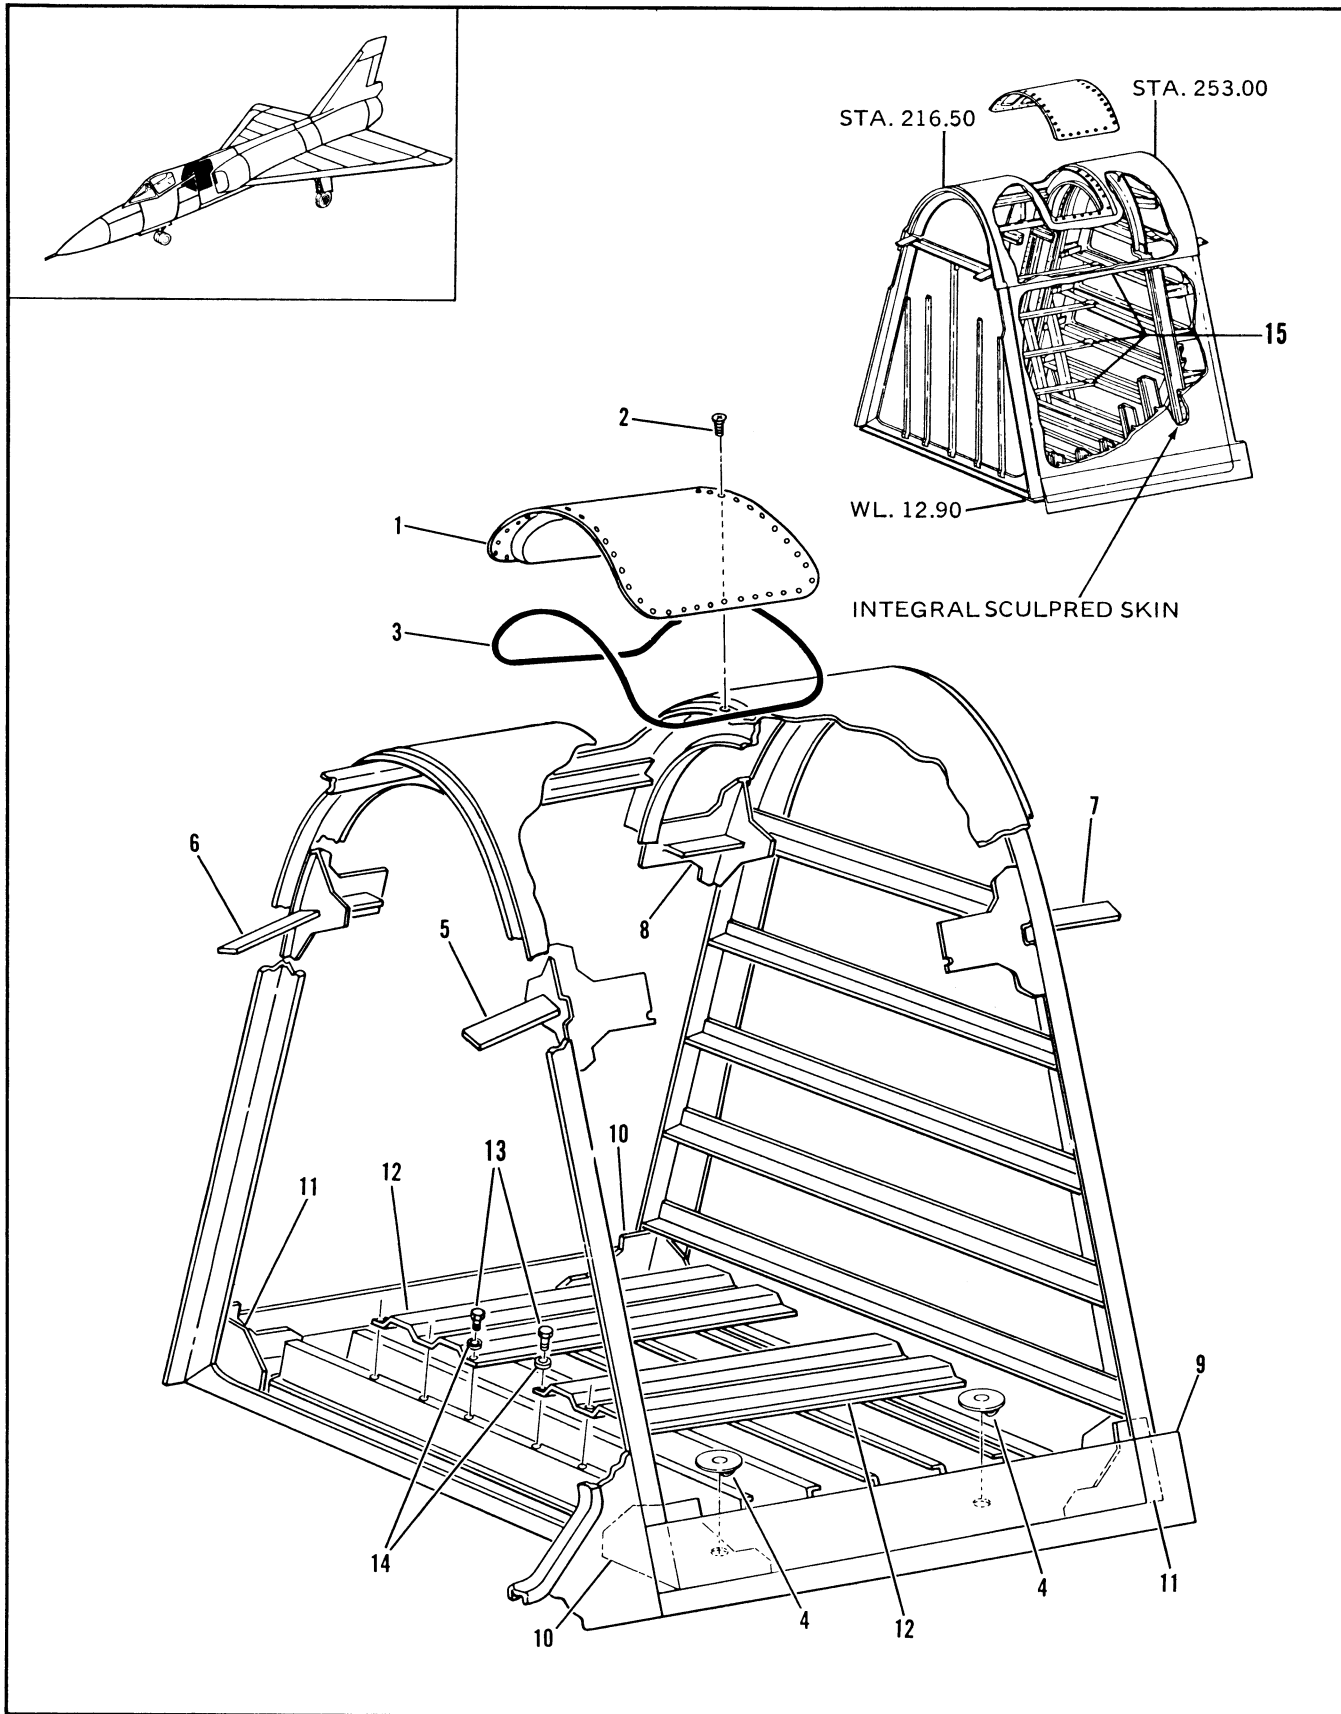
Fuselage Fuel Tank Structure Assembly
